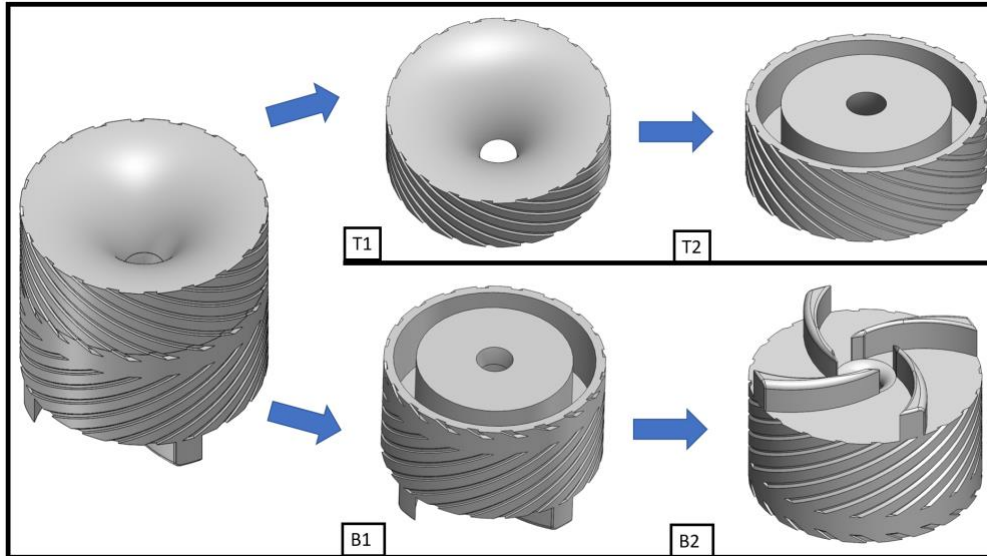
CAD images of the rotor as one piece and then split to create a top and bottom piece T1) the top piece of the split rotor in the same orientation as the whole rotor piece T2) Upside down view of T1 B1) the bottom piece of the split rotor in the same orientation as the whole rotor B2) Upside down view of B1
